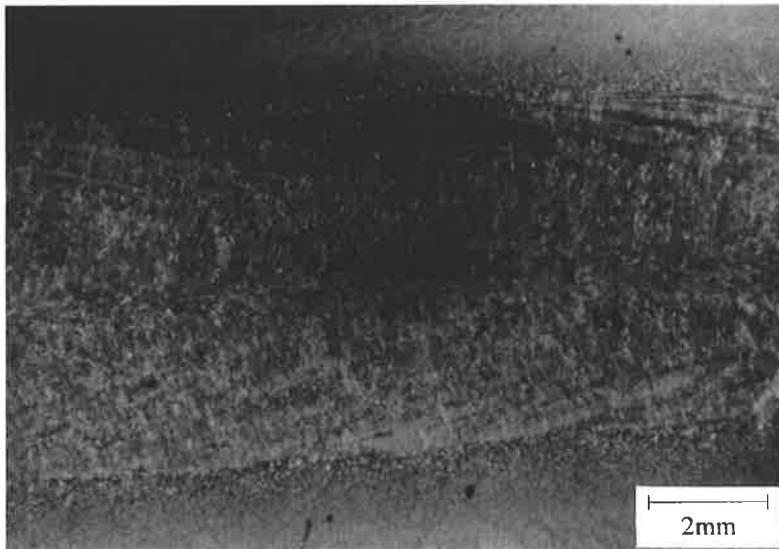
Longitudinal horizontal section of a weld made at 550mm/min and 170A (heat input equal to 0.51kJ/mm). In this weld the total number of hollow bead is 3 and the total length is 11mm.
